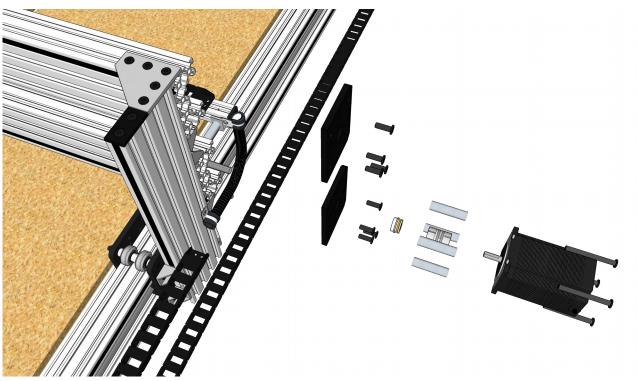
LEAD CNC Machine 1515 Disassembly: Disassemble Right Side
